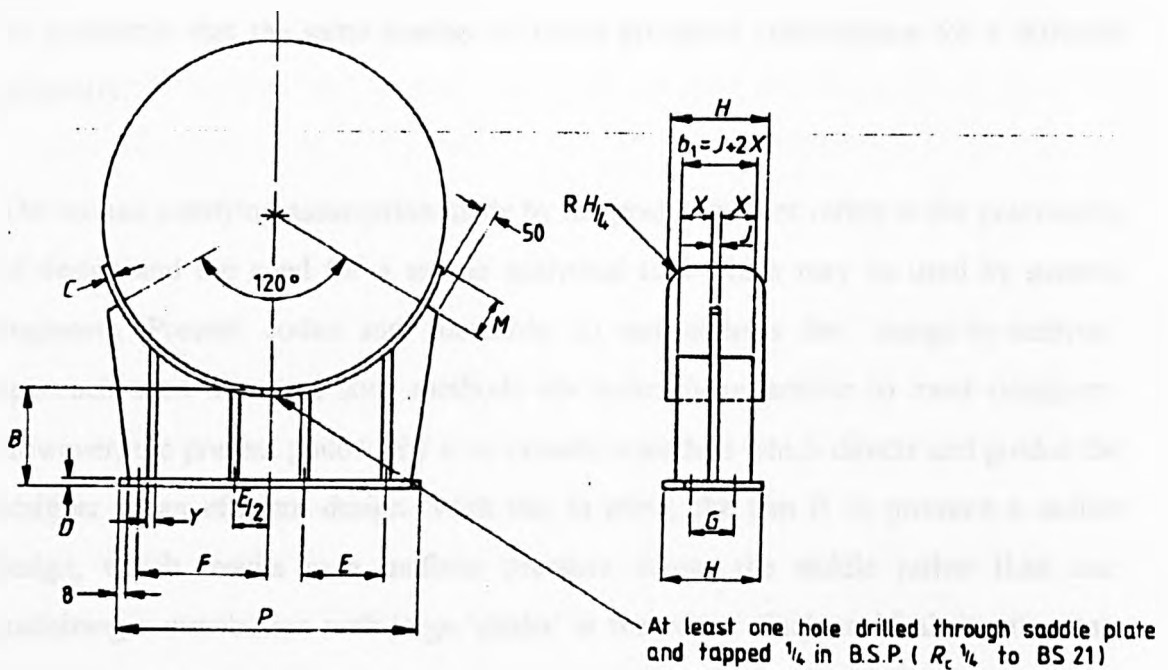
Typical saddle support and extended wrapper plate (after BS 5276)
